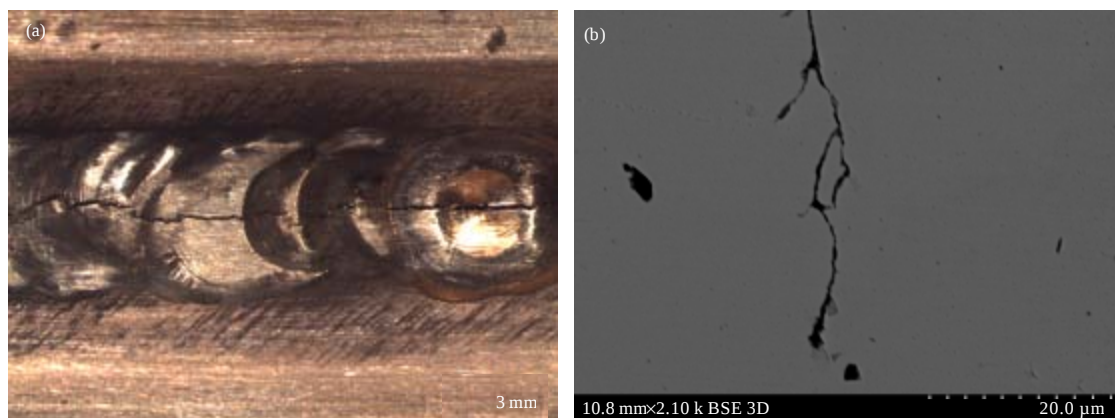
(a-b): Hot crack in the joint using HS201 by Ar shielding arc welding without preheating, (a) Longitudinal hot cracking and (b) Micro-cracking
